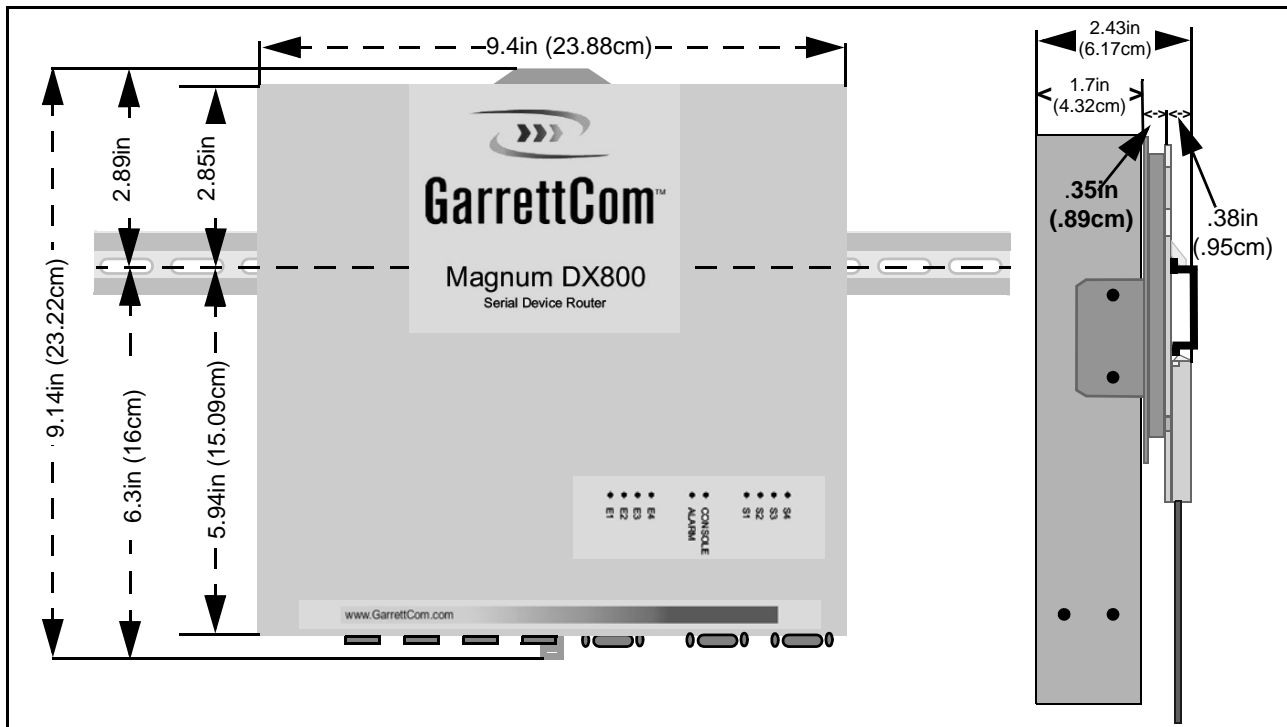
DIN Rail Mounting - Dimensional Drawing
